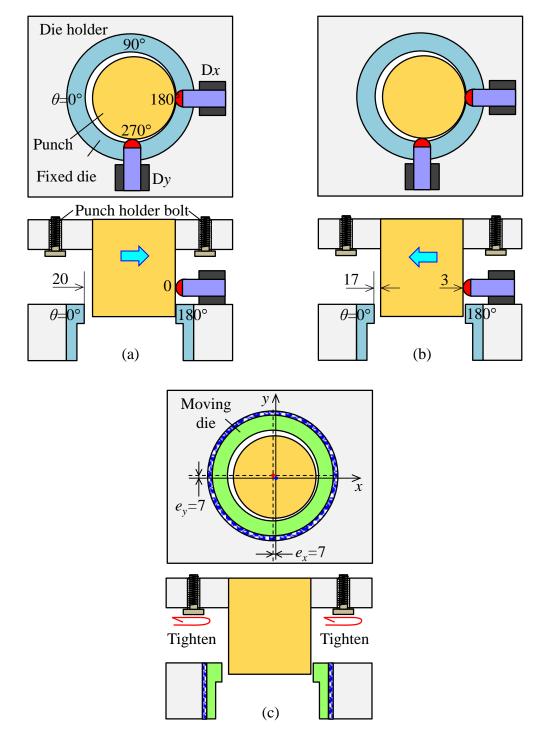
Procedure to set the initial status of eccentricity. (a) punch shift until touch edge of die (b) set eccentricity of 7 μ m and (c) tighten bolts of punch holder and replace fixed die with moving die.
